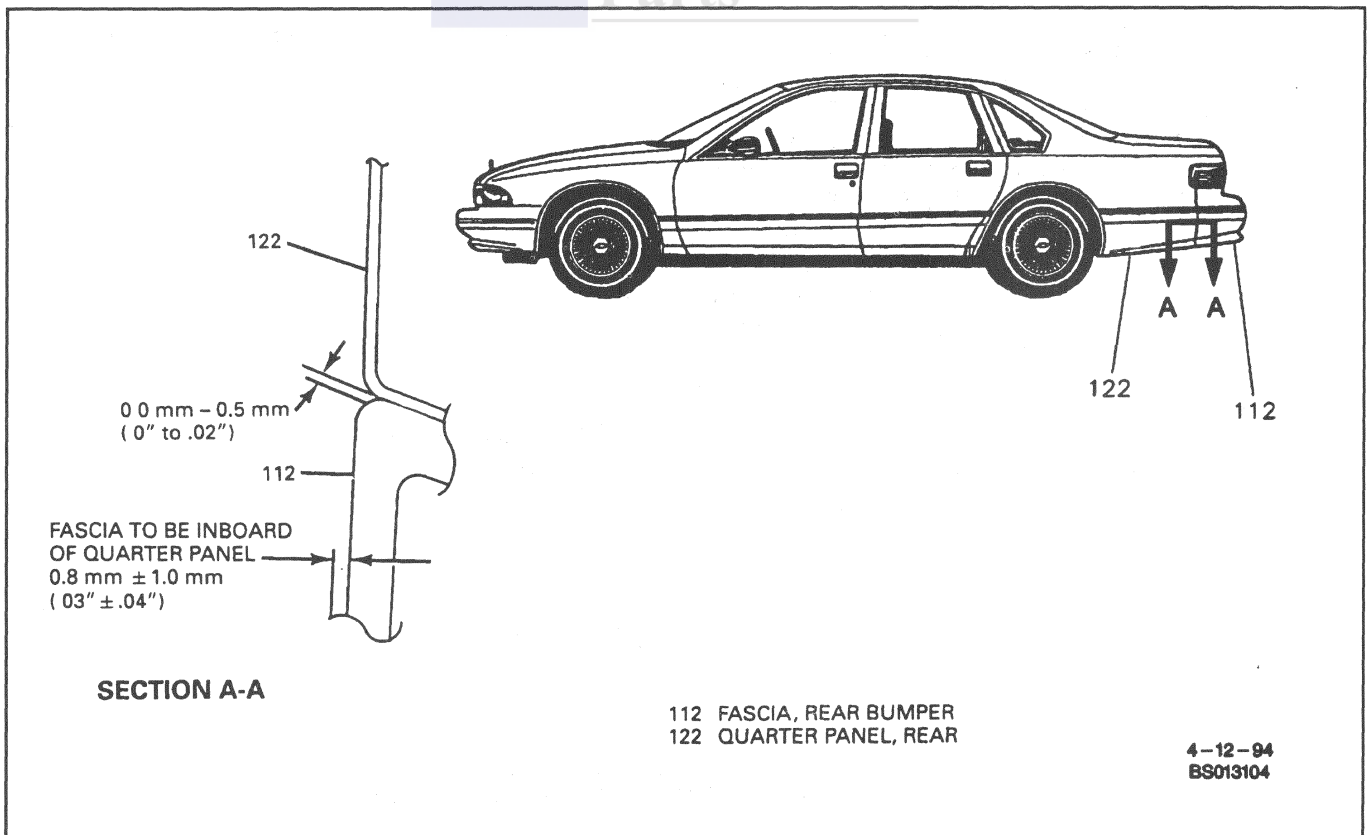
Rear Bumper Alignment - (Chevrolet Sedan)
